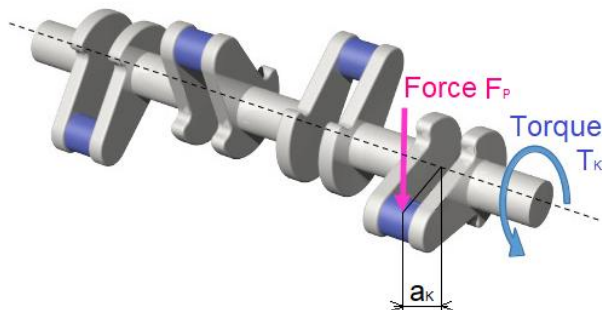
Torque T_K emitted on the crankshaft by the force F_p on the arm a_K
